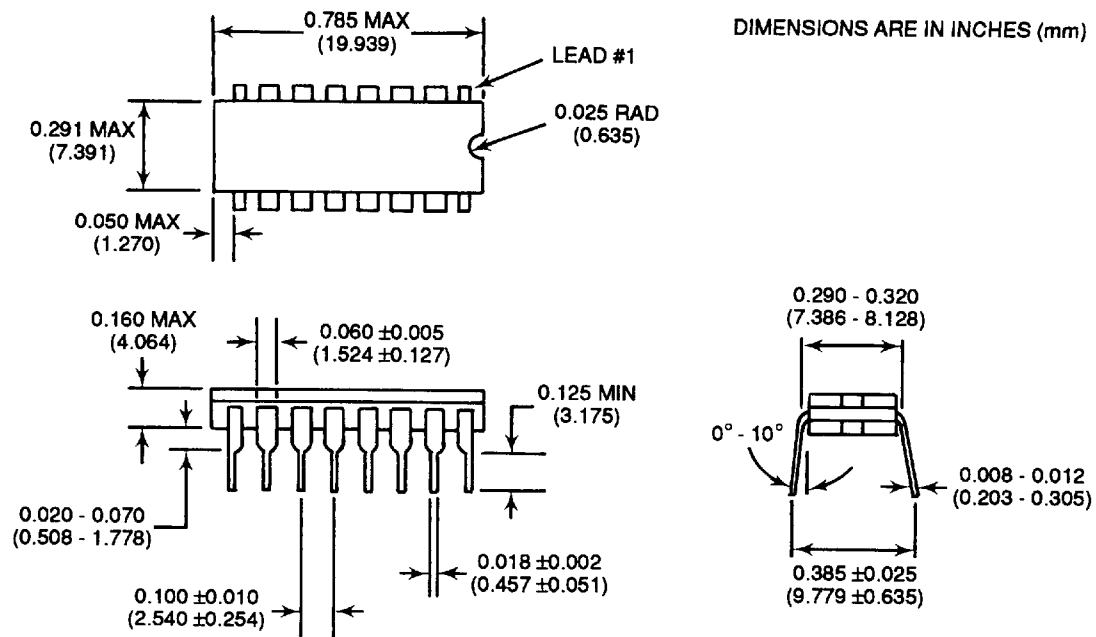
DD-03182 CERDIP (JE) MECHANICAL OUTLINE
